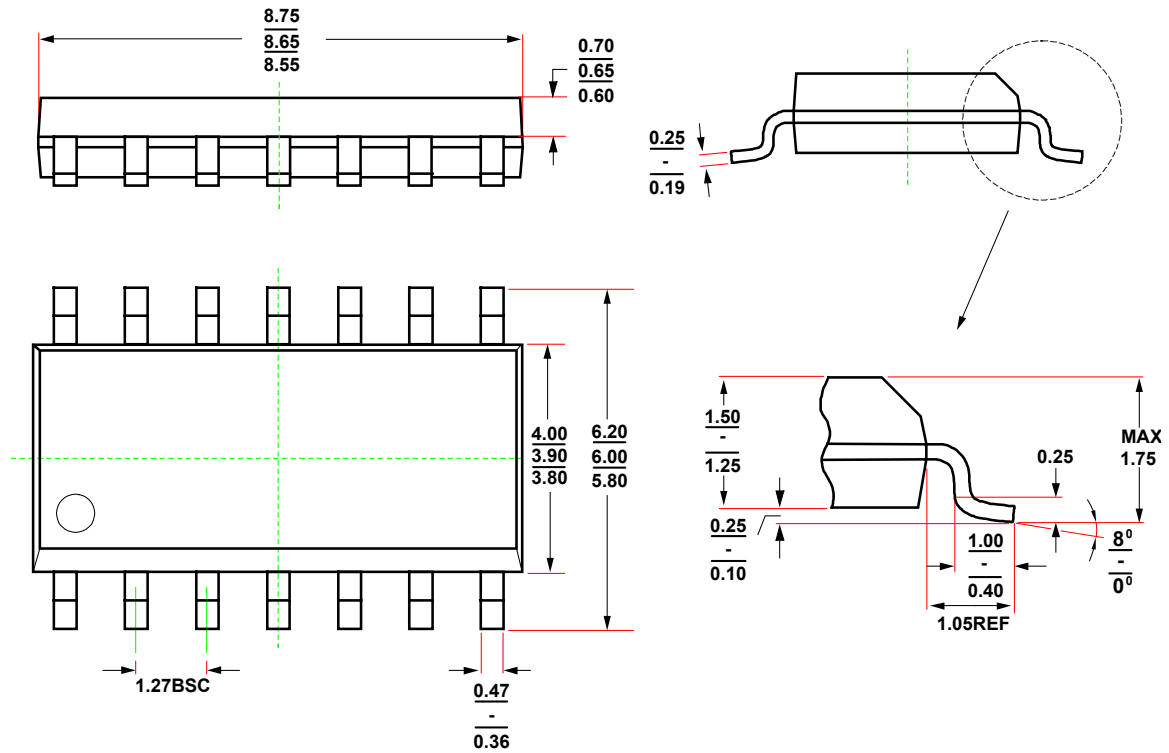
14-Lead SOIC Package Dimensions shown in millimeters
